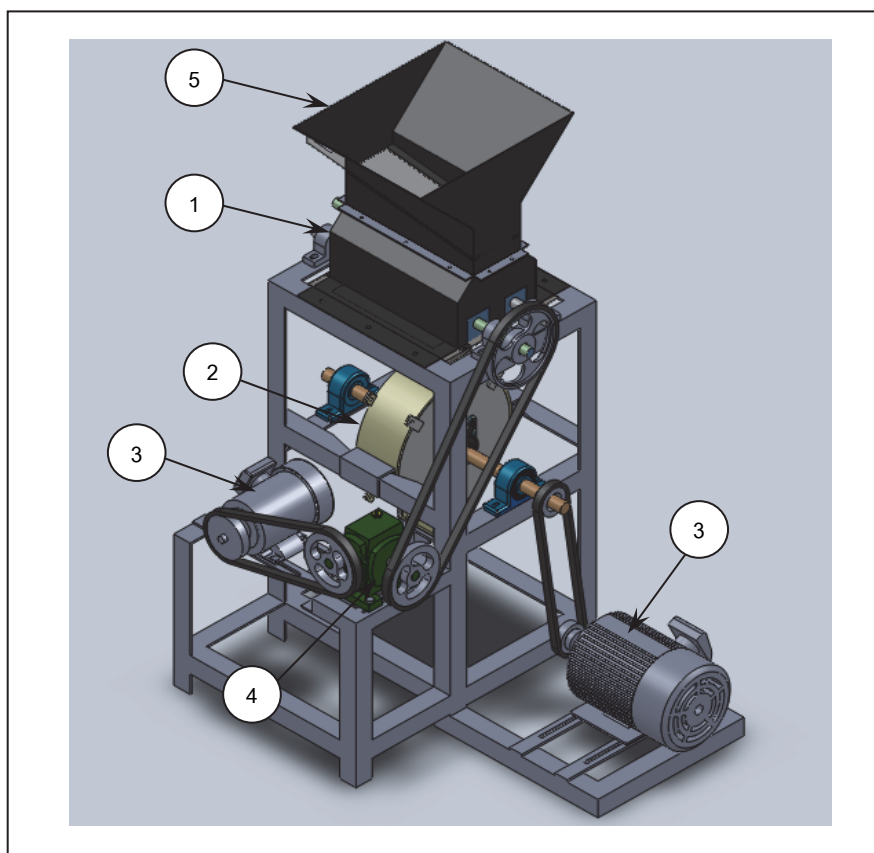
Prototype of mangosteen peel powdering machine: 1. Roller mill; 2. Hammer mill; 3. Motor; 4. Gear box; 5. Input channel
